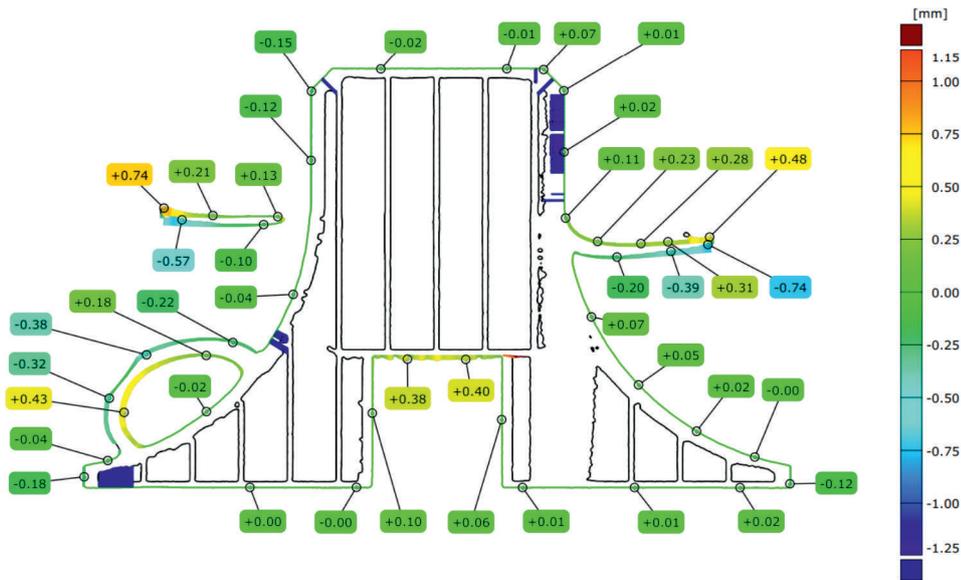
Inspection cross-section in the XZ plane on a printout with a 0.05 mm high layer
